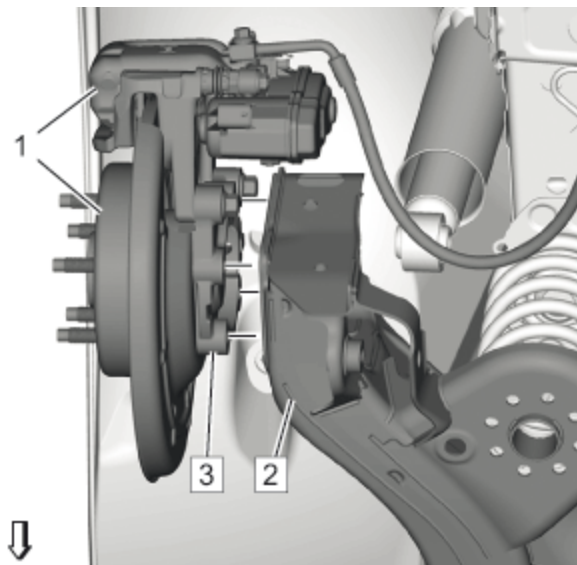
Rear Brake Assemblies, Rear Axle And Rear Wheel Bearing Hubs
